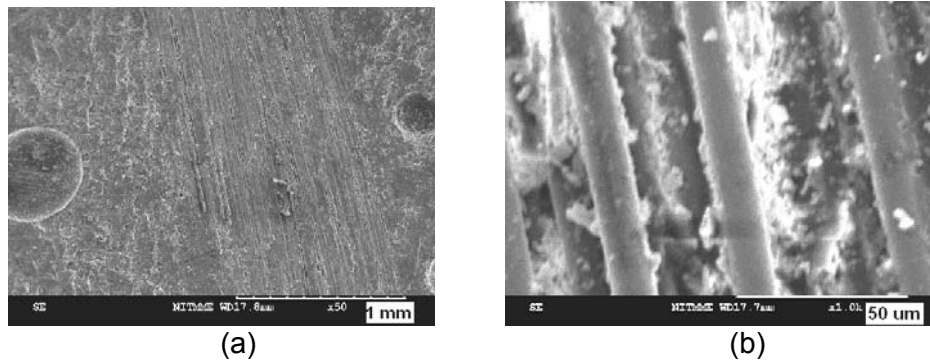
Machined surface of Hand Lay up pipes – Validated Experiment.
